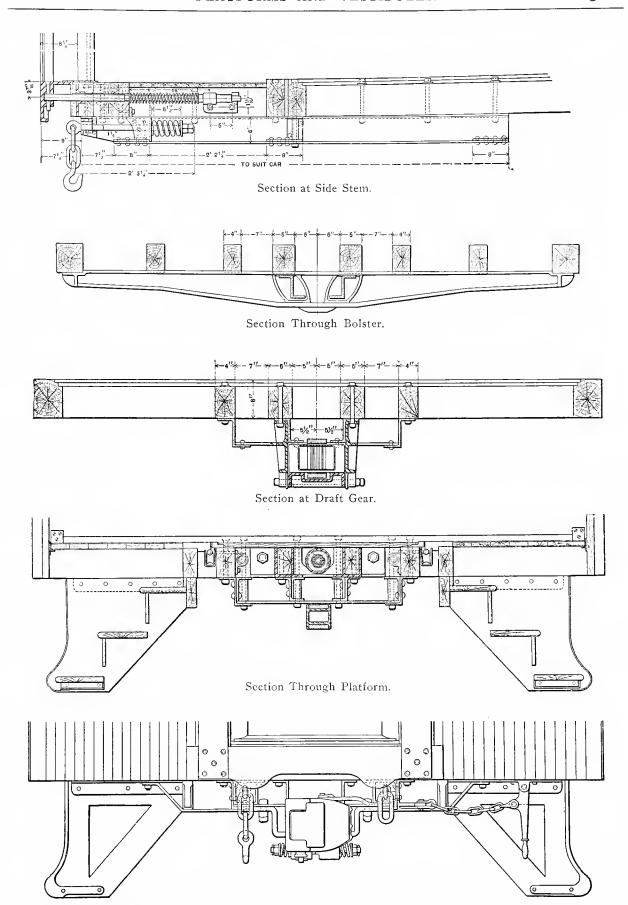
End Elevation and Cross Sections of Gould Wide Vestibule Steel Platform with Friction Buffer and Draft Gear. Gould Coupler Company.
